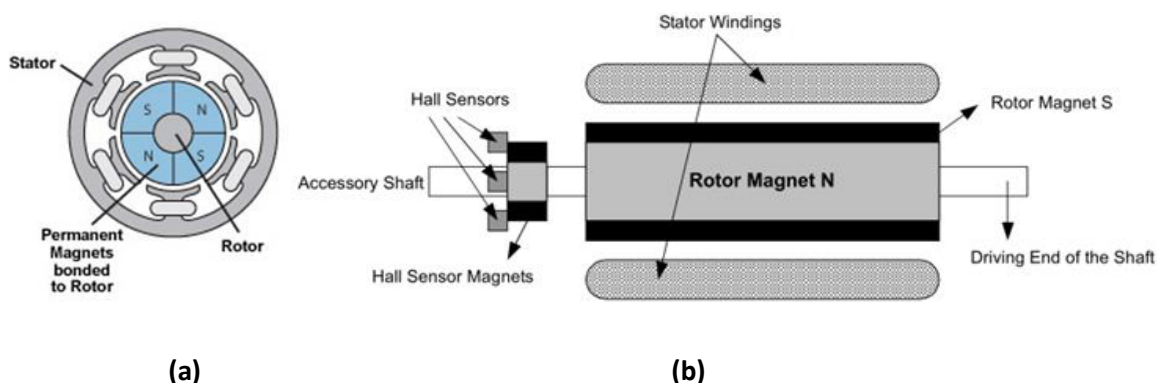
Construction of a BLDC motor (a) front view (b) transverse sectional view
